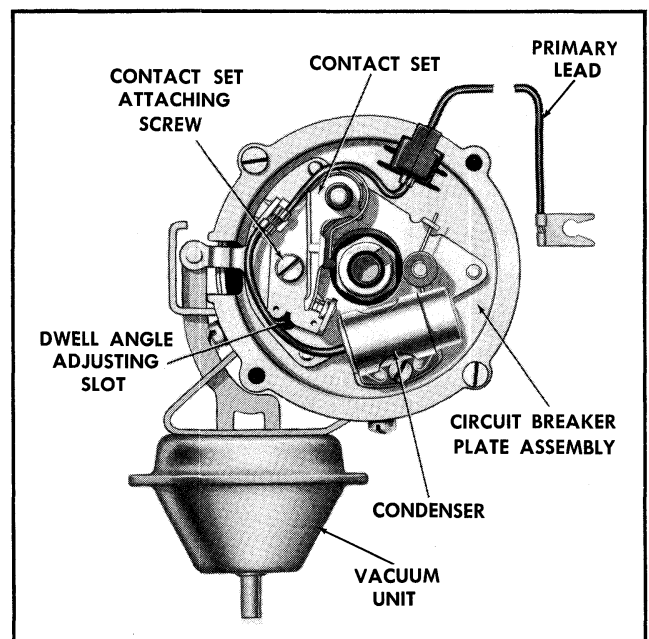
Top View of Distributor (Cap and Rotor Removed)
